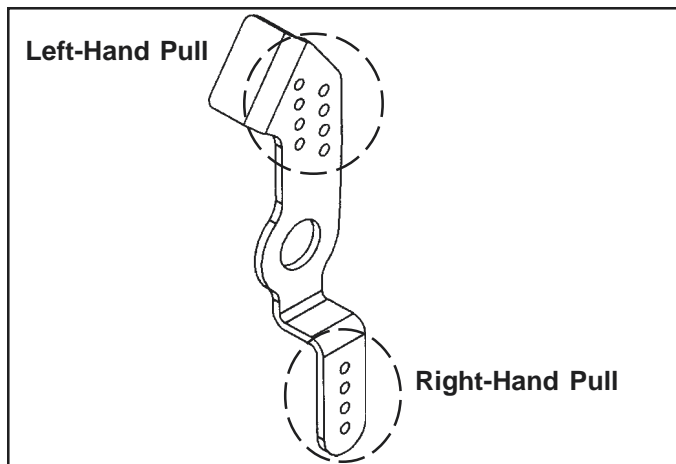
One-Piece Lever, Left or Right-Hand Pull.
